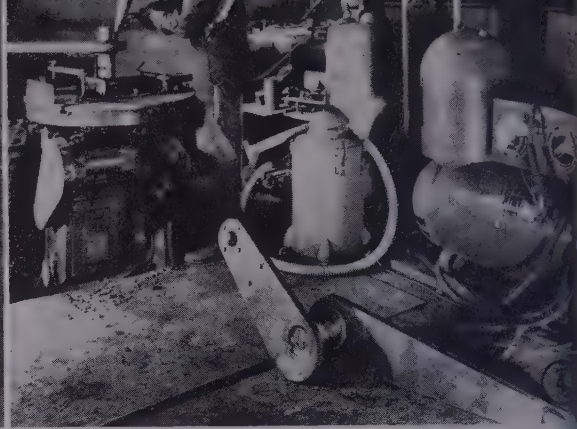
A 12-foot trunnion wheel for coal crusher. Three passes are made continuously to make a $\frac{5}{8}$ -inch fillet weld. No edge preparation is necessary
